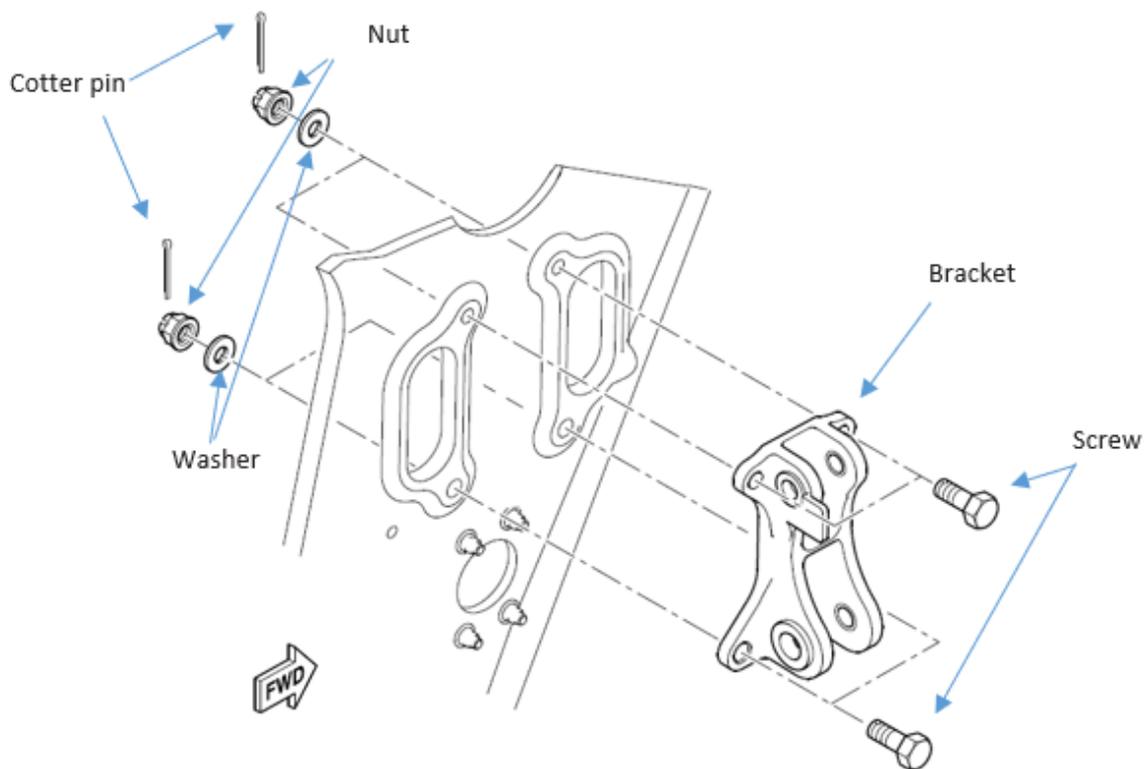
assembly of locking-stay bracket (source: Embraer, annotations BEA)
